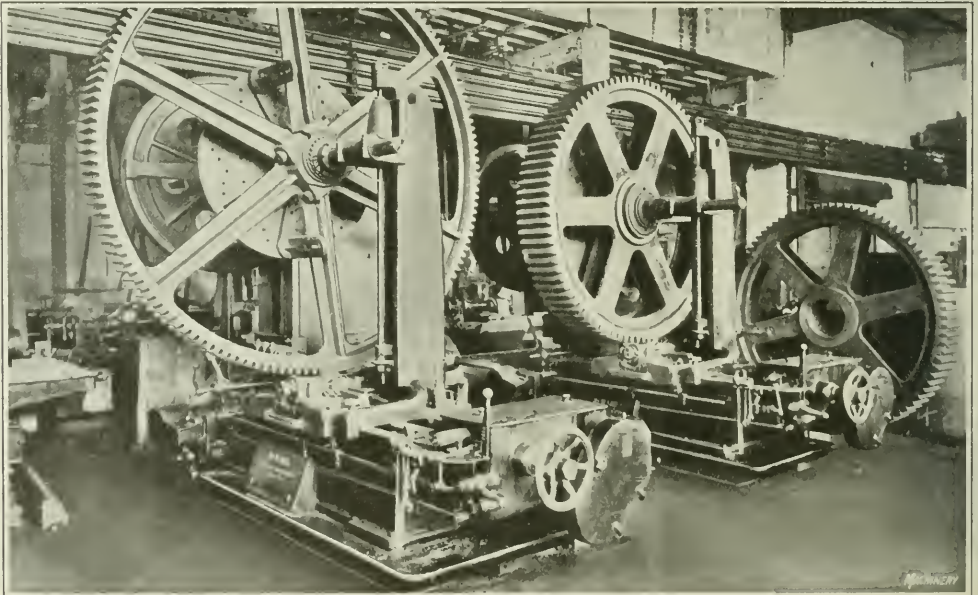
Examples of Gear-cutting on Machines of the Formed-cutter Horizontal-feeding Type
